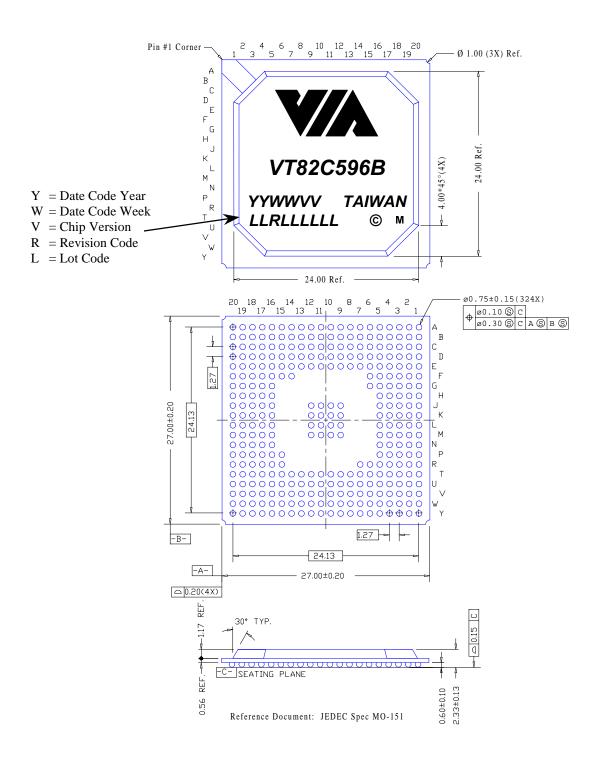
Mechanical Specifications - 324-Pin Ball Grid Array Package
